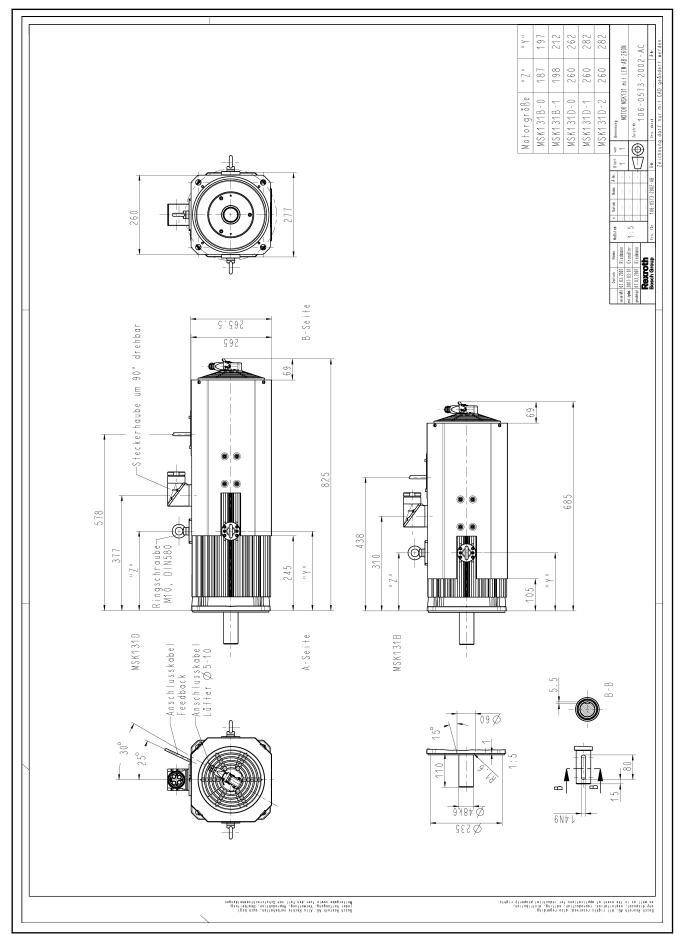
Dimension sheet MSK131 with axial fan unit
